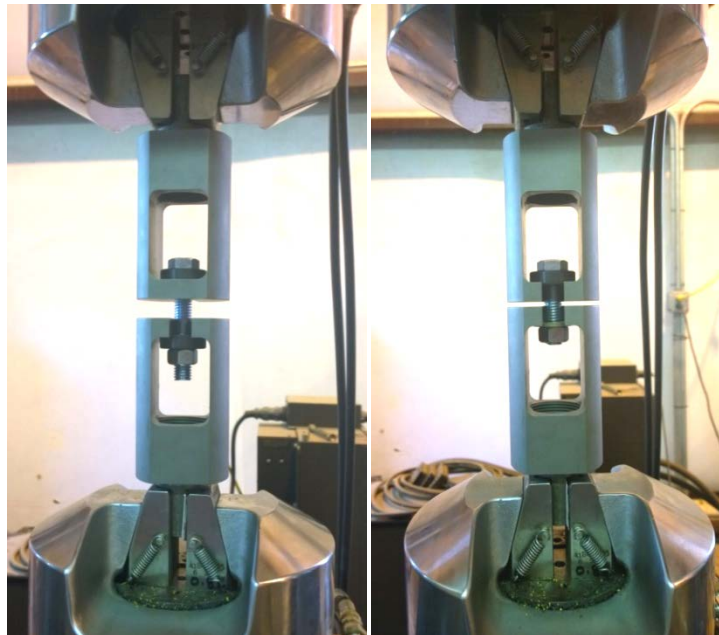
Typical ASTM F606 Test Setup for, from Left to Right, Double and Single Shear Bolts.
